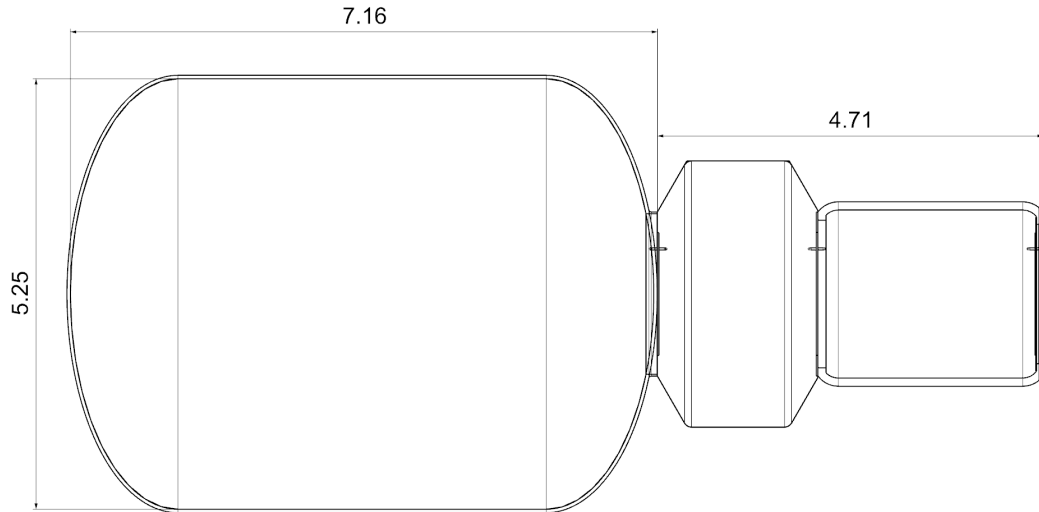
Micro-gravity 80 m³ Dimensioned External Drawing, units in meters
